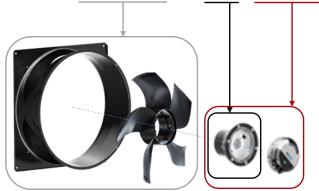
A Driven Fan consisting of at least an Impeller, stator and motor
